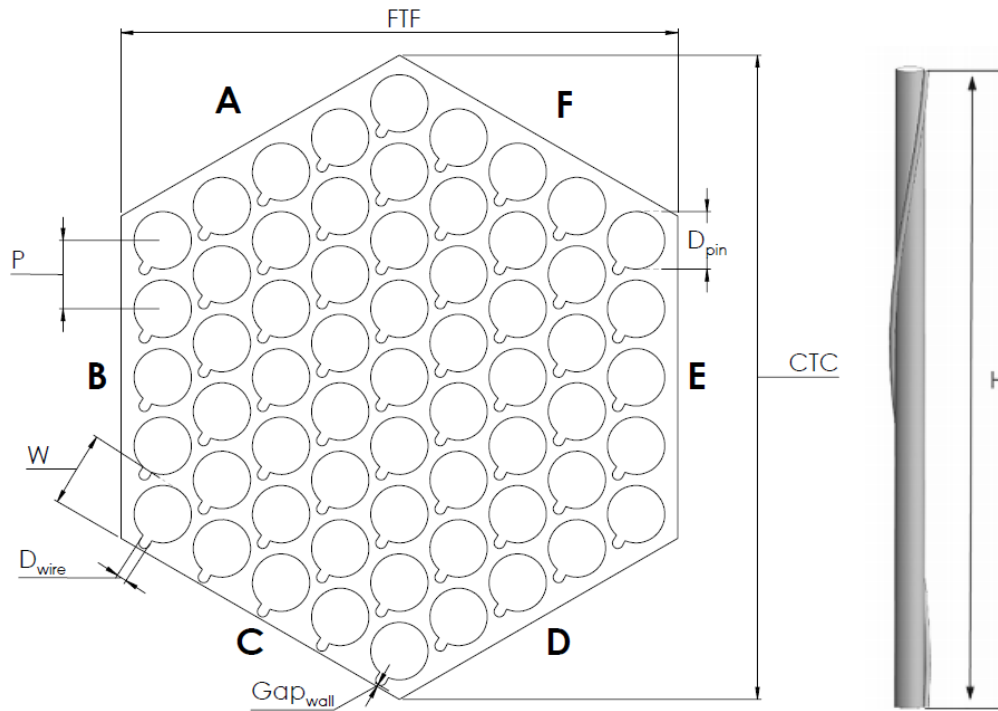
Cross section of 61-Pin hexagonal fuel bundle and geometry.
